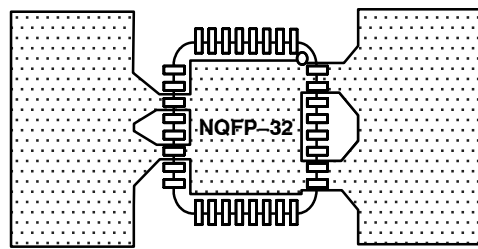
Example of NQFP-32 PCB Ground Plane Layout (preferred layout at top and bottom)
